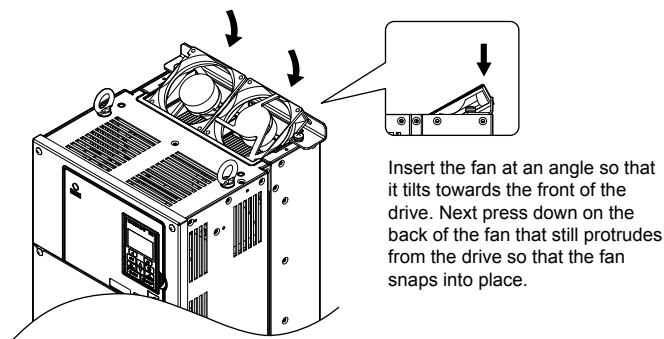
Install the Cooling Fan: 2A0110, 2A0138, 4A0058, 4A0072, 5A0041, and 5A0052
